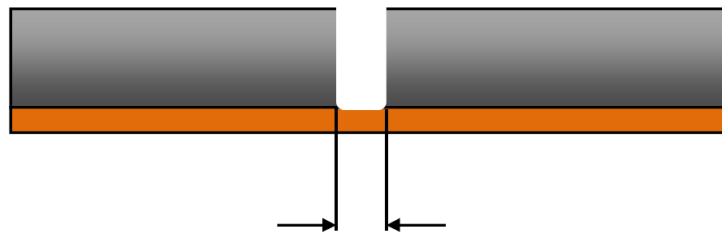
Drilled bore prior to widening and welding, internal diameter 6 mm bigger than bore of the branch connection
